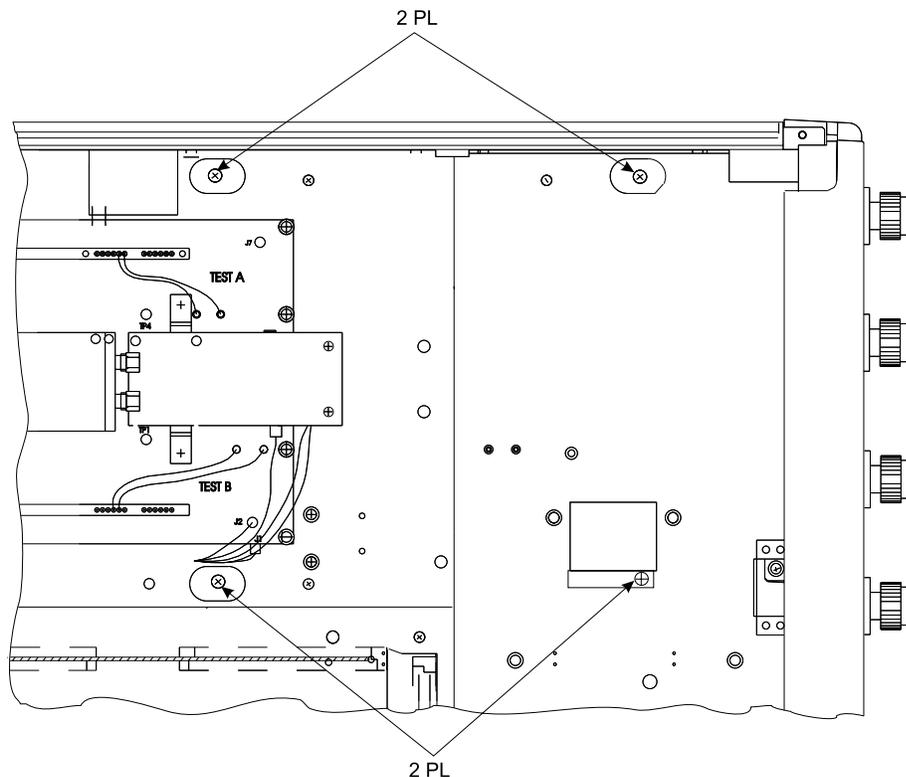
Location of Internal VGA Monitor Assembly Mounting Screws
